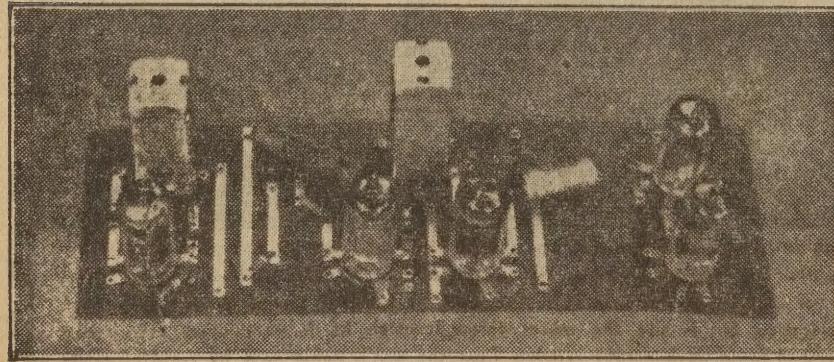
Deck ready for insertion in metal chassis having cut-outs to admit tubes and transformers. The few flexible wires from chassis-mounted speaker, tuning, capacitor, and other controls pass through cut-outs to stamped wiring deck pins, and are held in place by female connectors.
